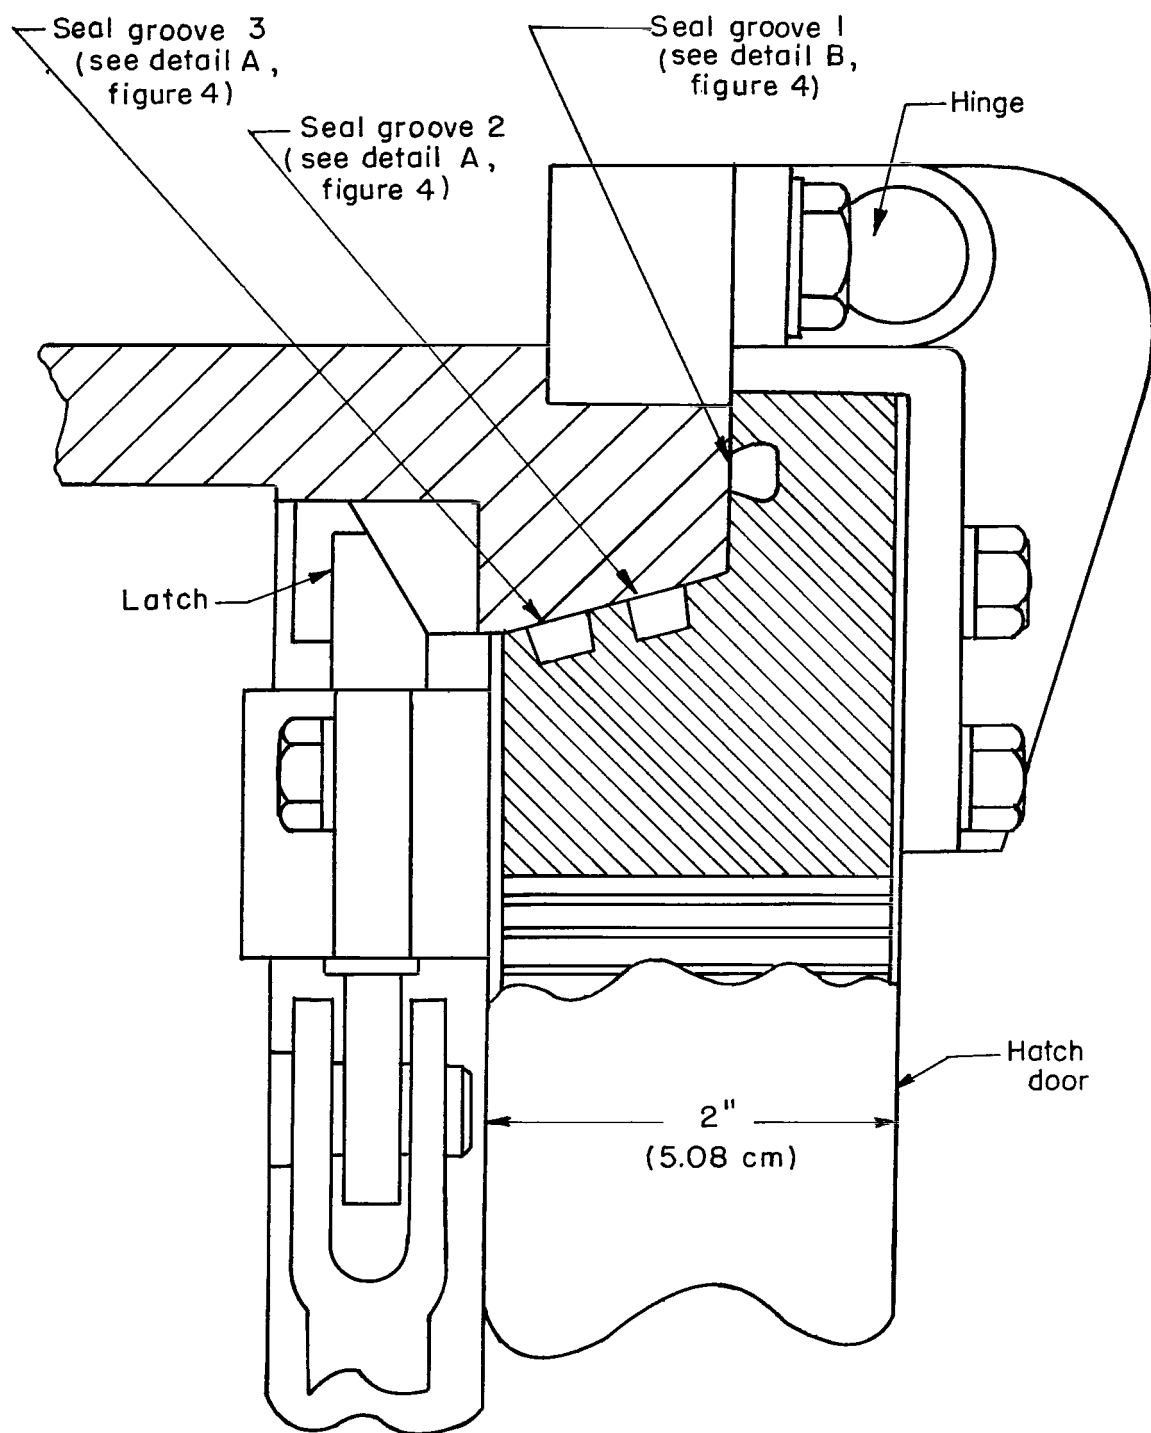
Cross section of the hatch door seated in the hatch frame.
